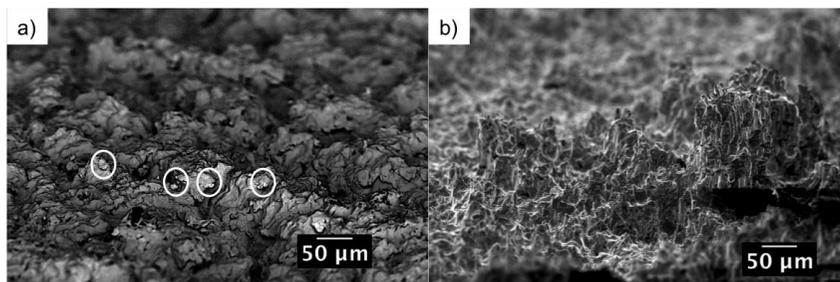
Fracture surface topography of the FPWJ-2 sample; (A) substrate side and (B) coating side. Copper residues that remained on steel surface are circled.
